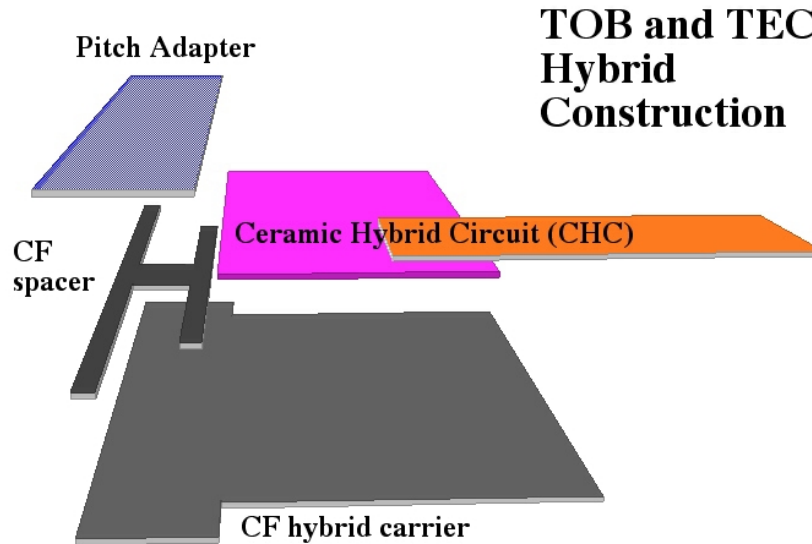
Exploded view of the components which comprise a TOB or TEC hybrid.
